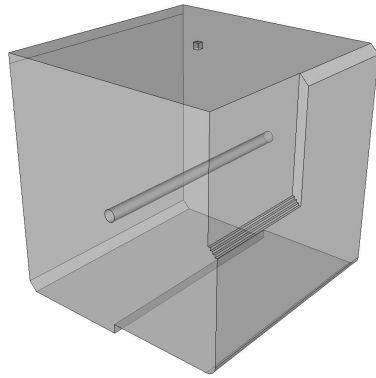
CAD model with chamfer, hole, steps, pegs, fillet, and imprint
